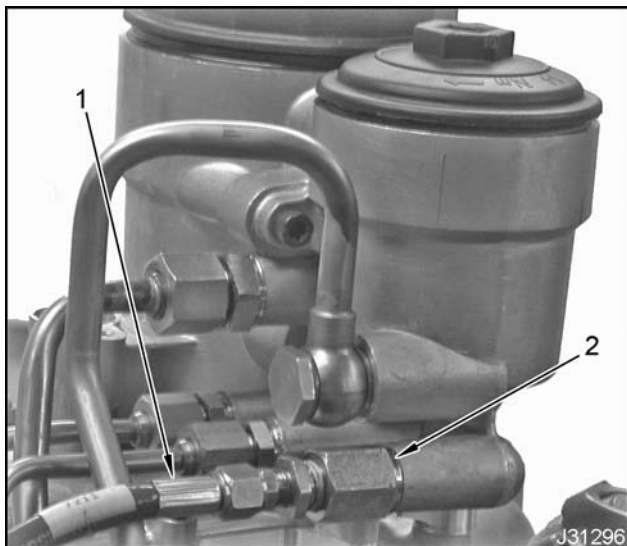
ICP System Test Adapter installed with Fuel Pressure Gauge
